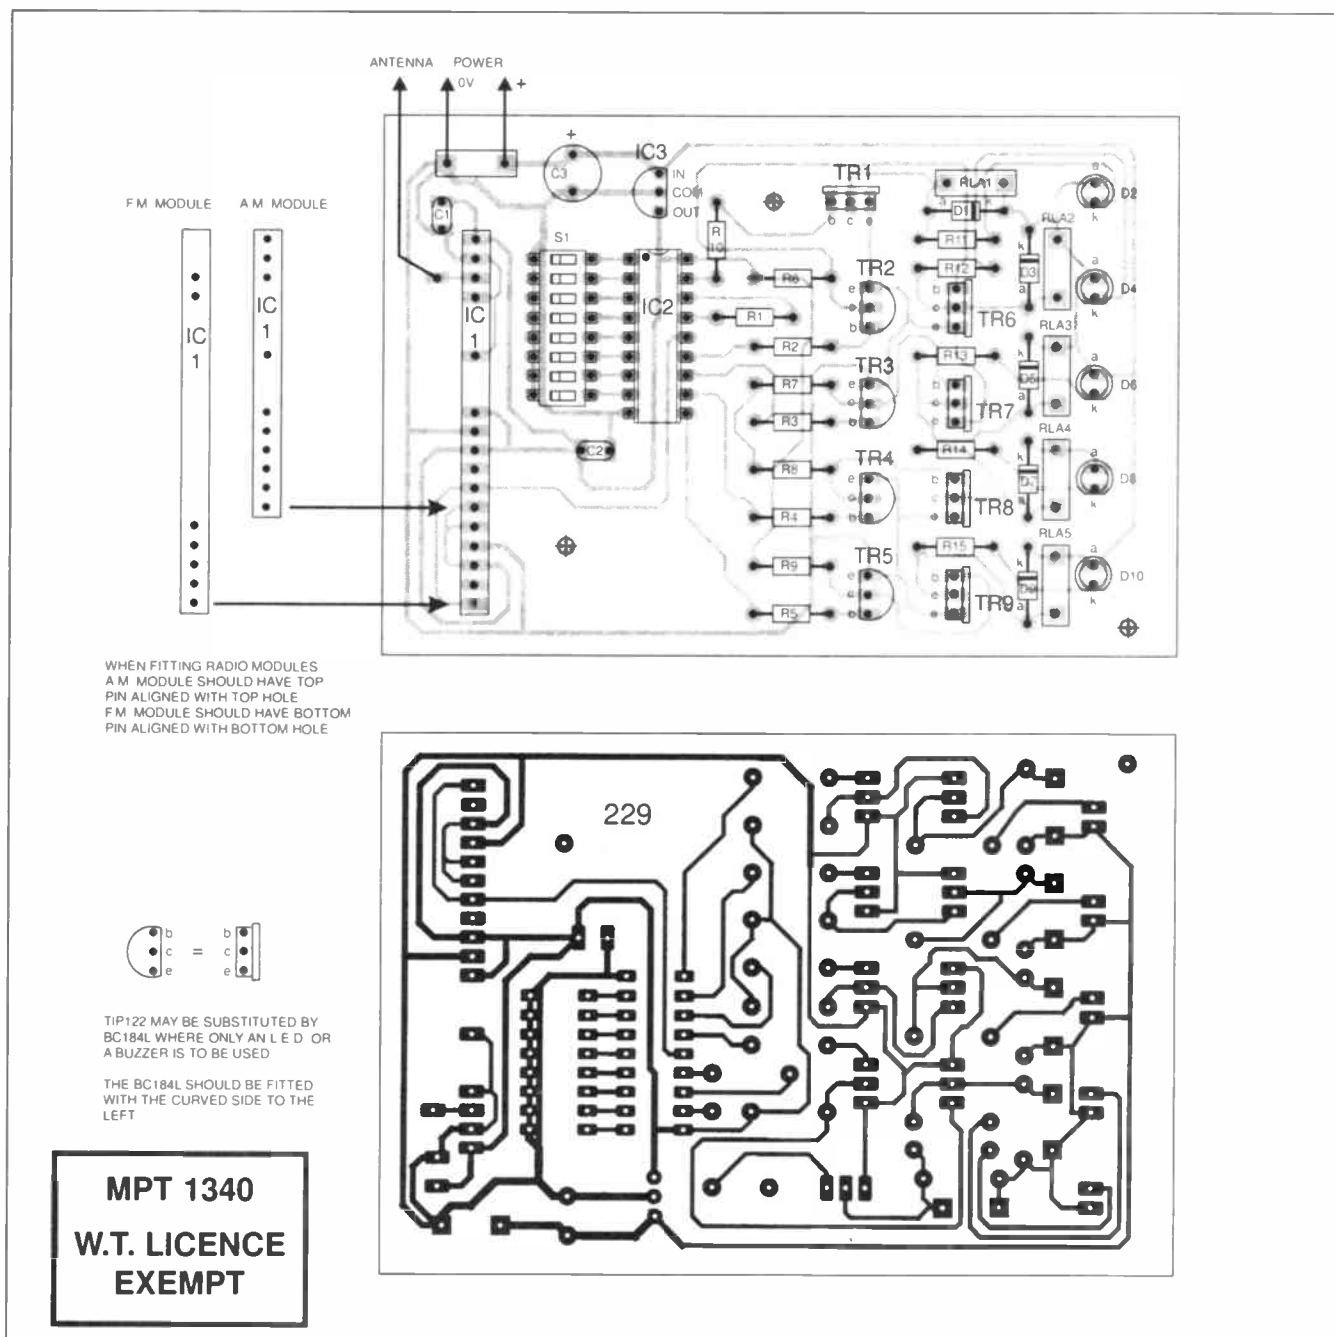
Component layout and full size master foil track pattern for the Receiver p.c.b.
